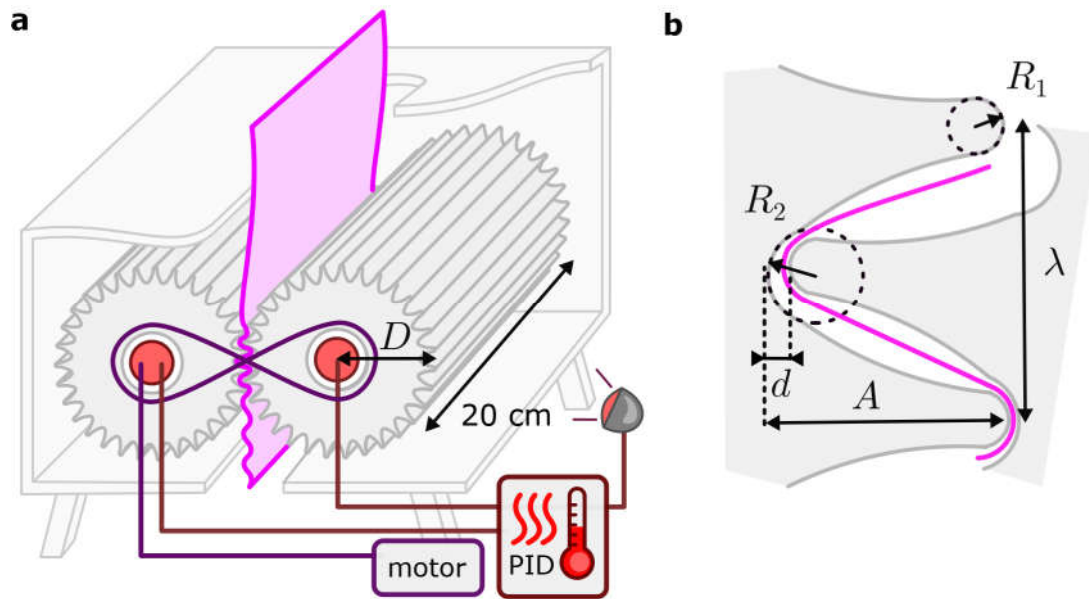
Dynamic thermoforming with heated gears. a, A schematic presentation of the setup. Two aluminium gears (grey), 20 cm long and with diameter D , are mounted on parallel spindles. One spindle is rotated by an external motor; a serpentine belt passively drives the second spindle. A heating rod (red) is inserted into the hollow centre of each gear. The gears are kept at temperature via a heat-sensitive camera connected to a PID controller. The gears are mounted inside a metallic casing. Flat plastic film (pink) is fed into the gears via a slot in the casing, and emerges with plastically deformed grooves. b, Gear geometry. Tooth amplitude A , tooth pitch λ , inner and outer radii R_1 and R_2 , and gear spacing d are shown (values: see main text). The sides of each tooth are concave to ensure smooth rotation. An inserted sheet (pink line) deforms accordingly.
